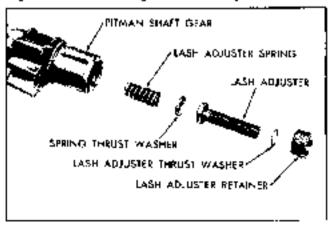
Peris in End of Pitman Short Gear -DO NOT DISASSEMBLE
